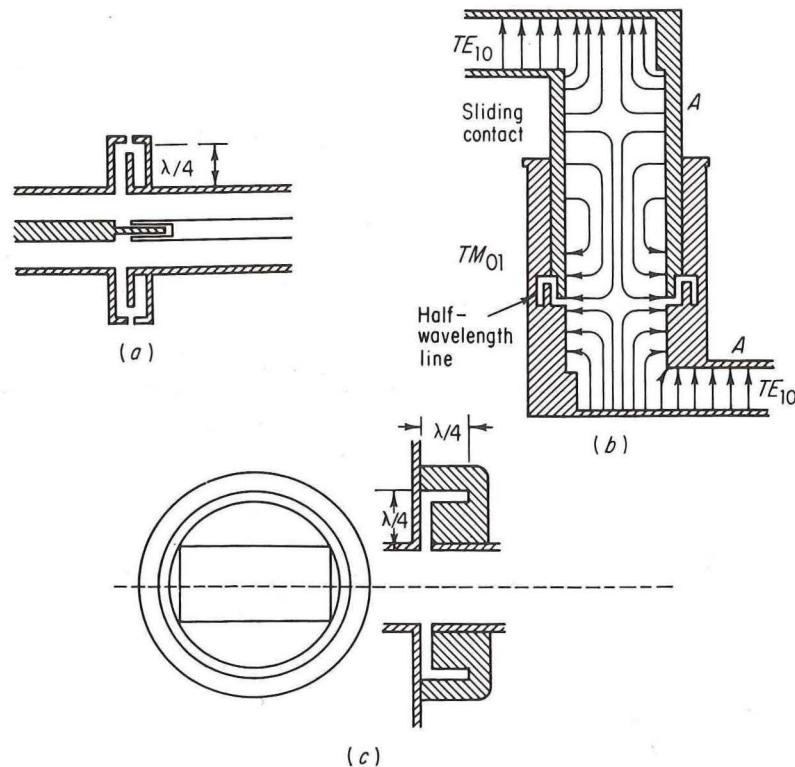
Waveguide joints. (a) Coaxial rotating choke joint. (b) Waveguide rotating joint. (c) Waveguide choke joint.
